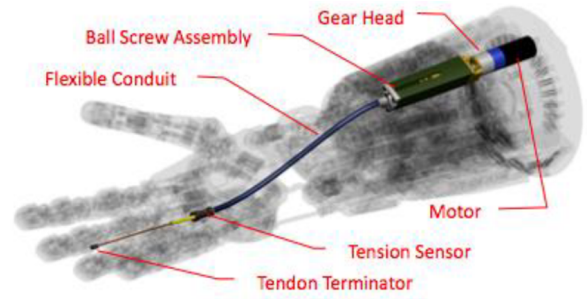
Actuator and Bowden tube routing for Robonaut II [6]
